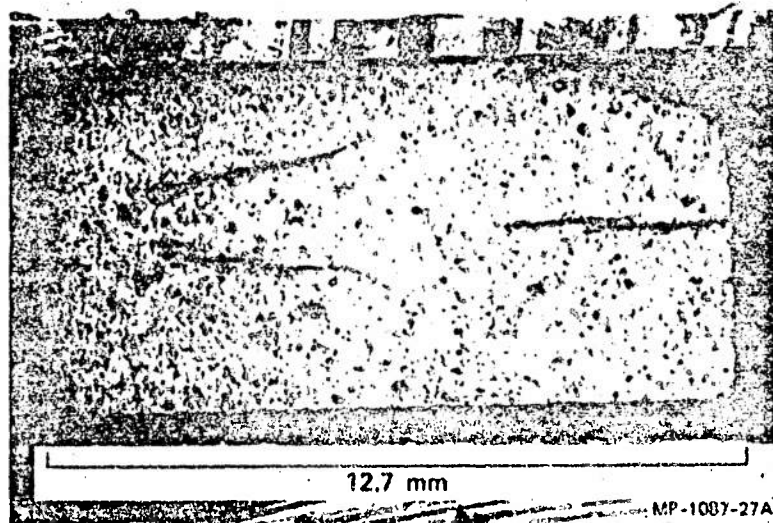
CROSS-SECTIONAL VIEW OF SPECIMEN 30 SHOWING
